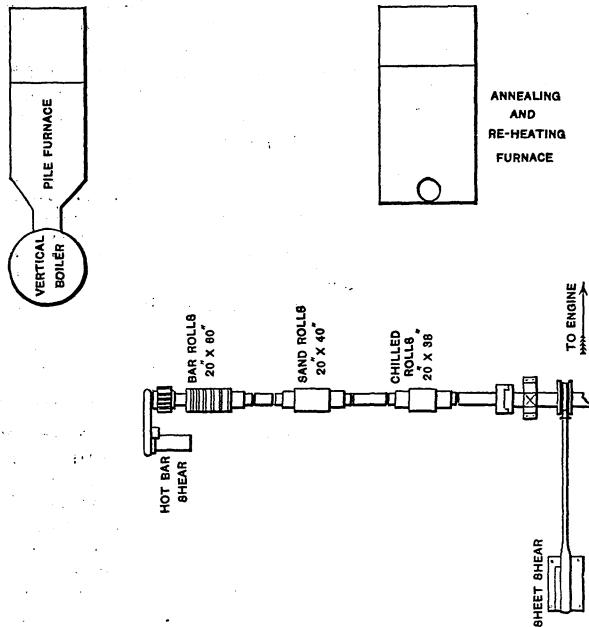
Plan of English Sheet Mill, 20-Inch Rolls.
